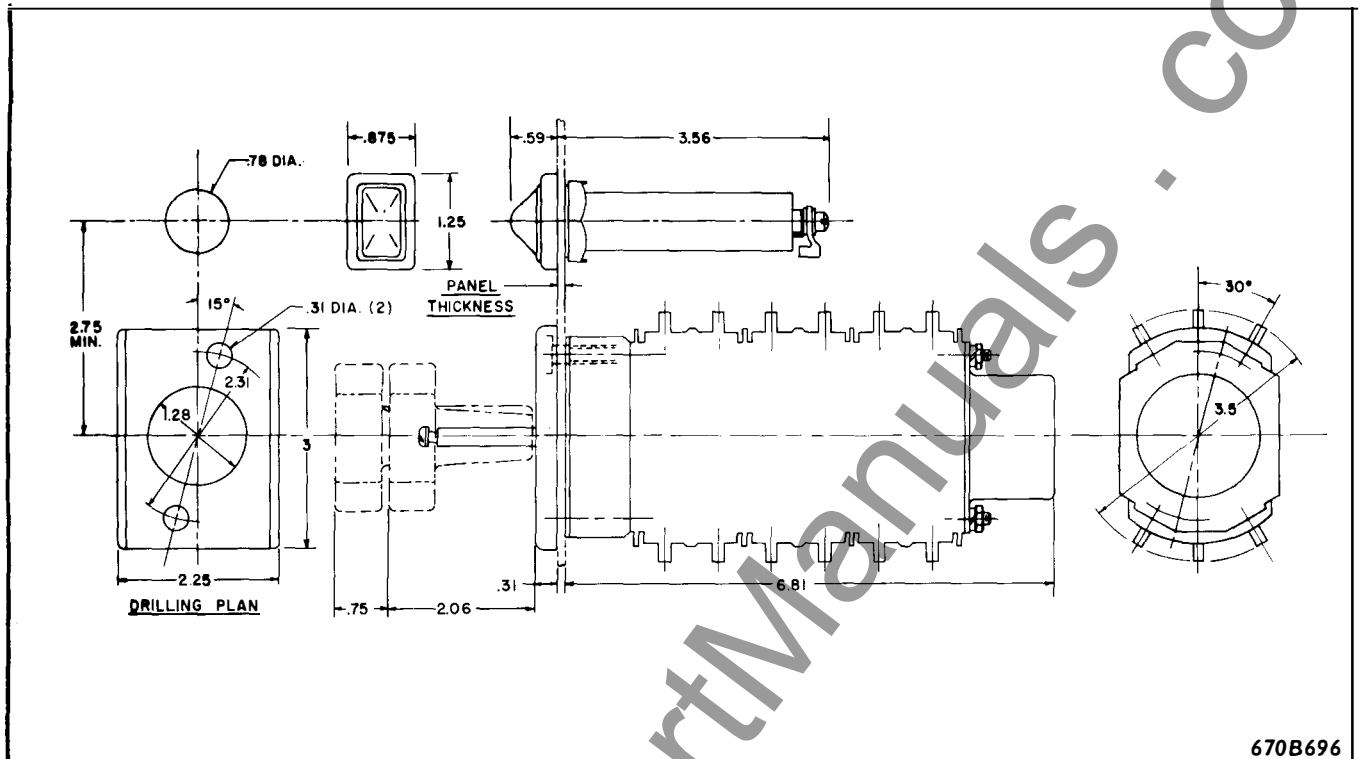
Outline and Drilling Plan of the Type W-2 Test Switch and Indicating Lamps Used for SKB or SKB-1 Testing
